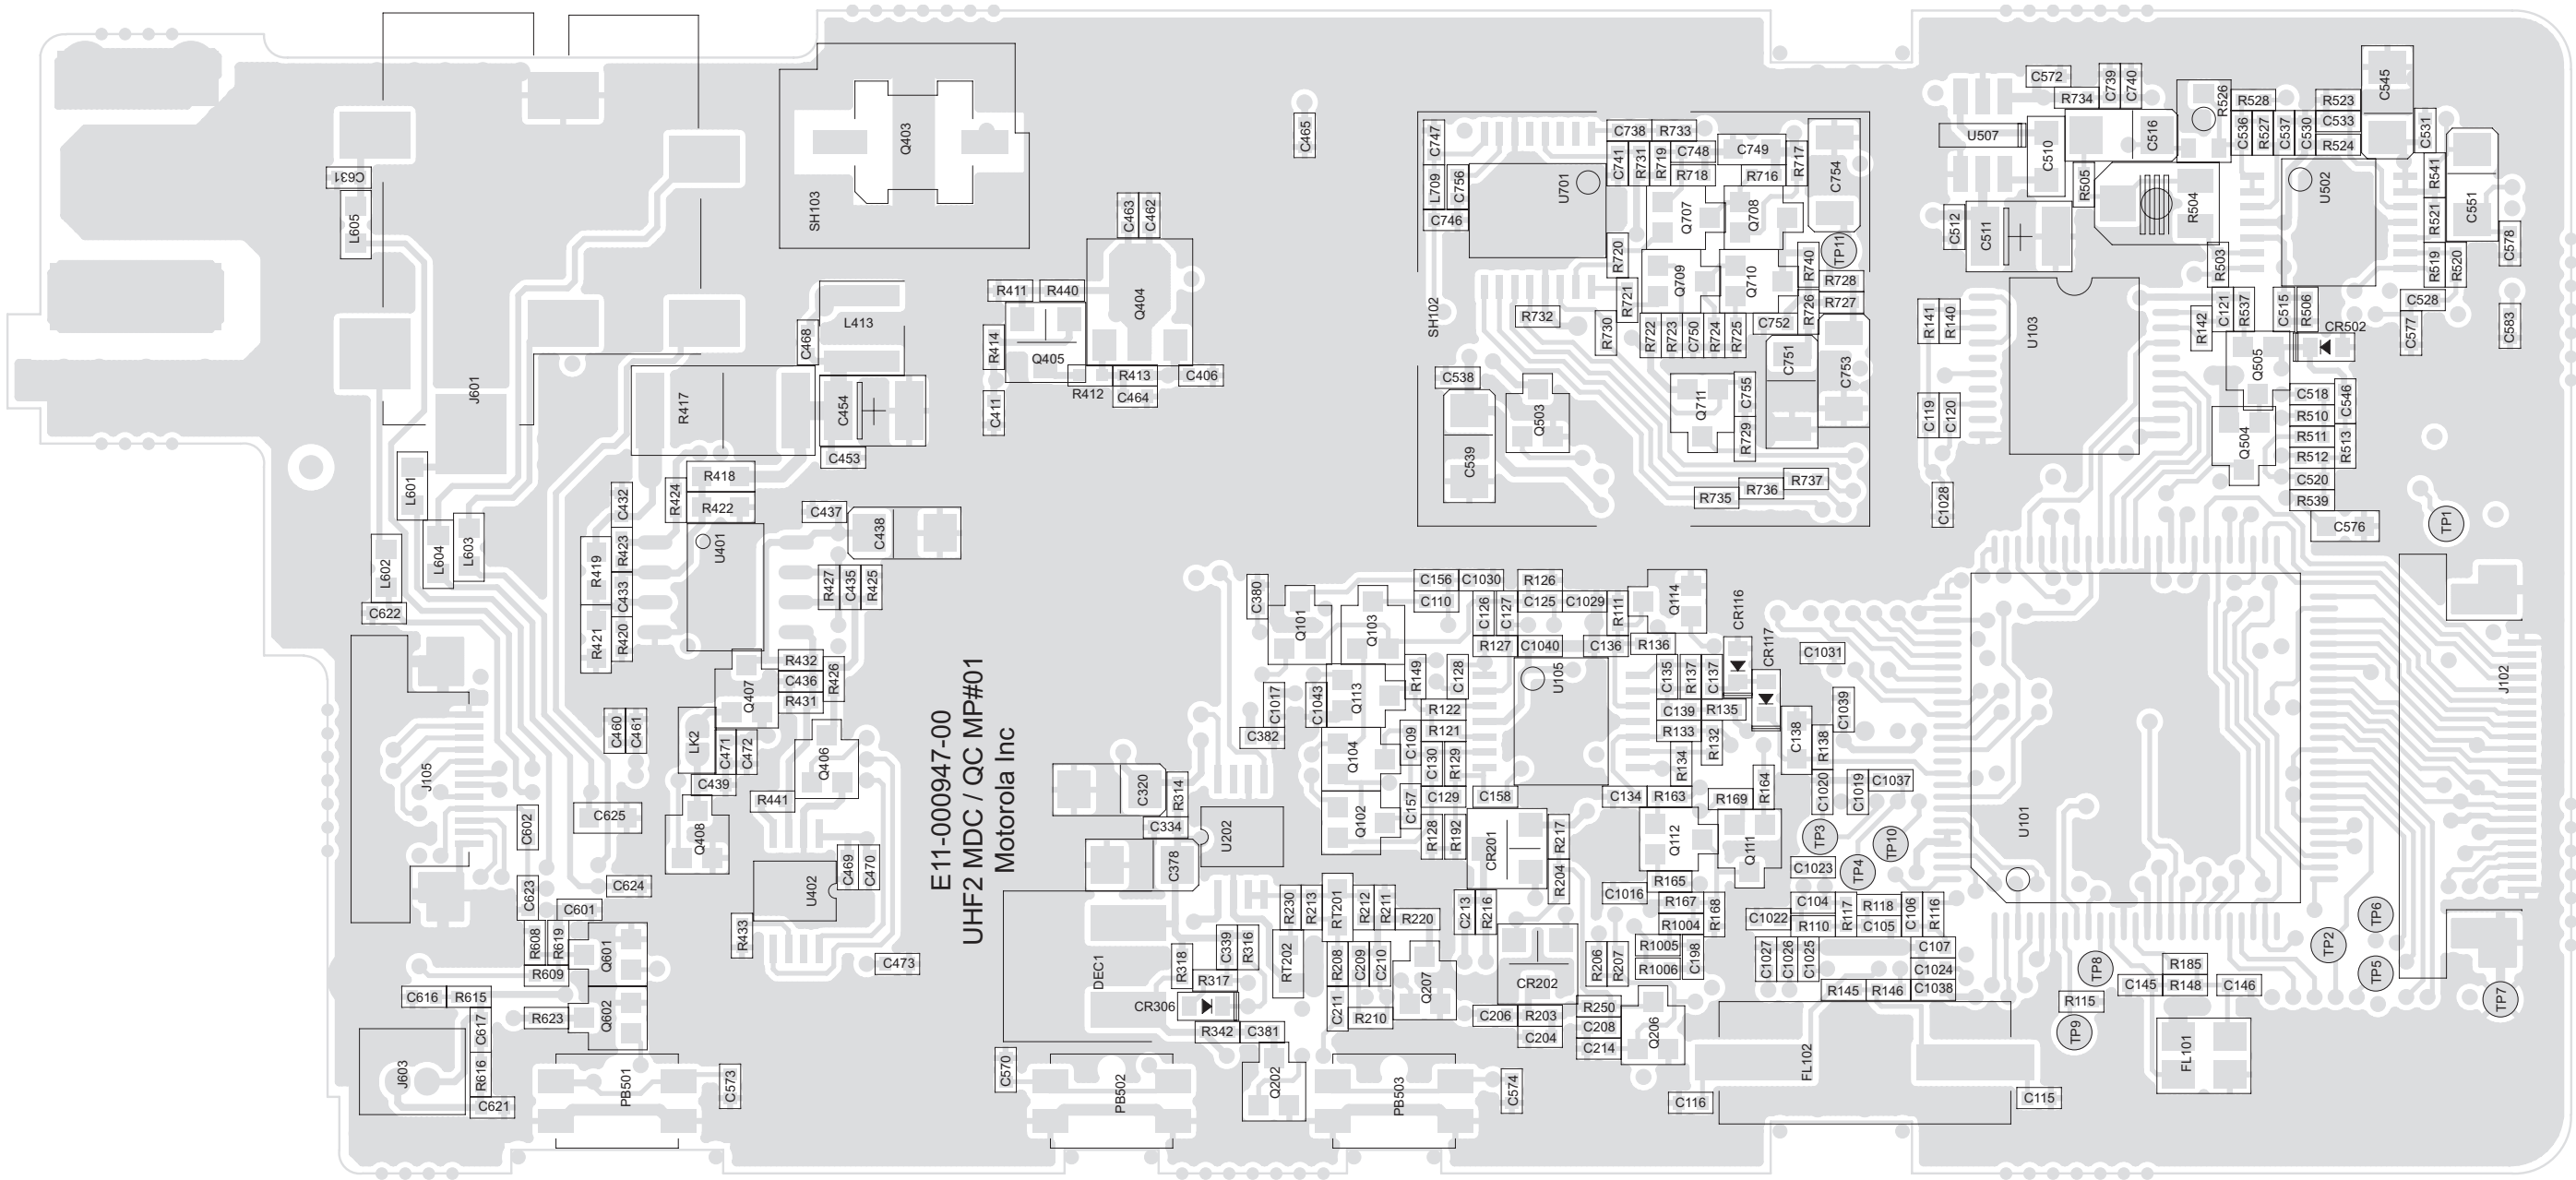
UHF2 (435–480 MHz) Mainboard Top Side: PCB No. E11-000947-00
